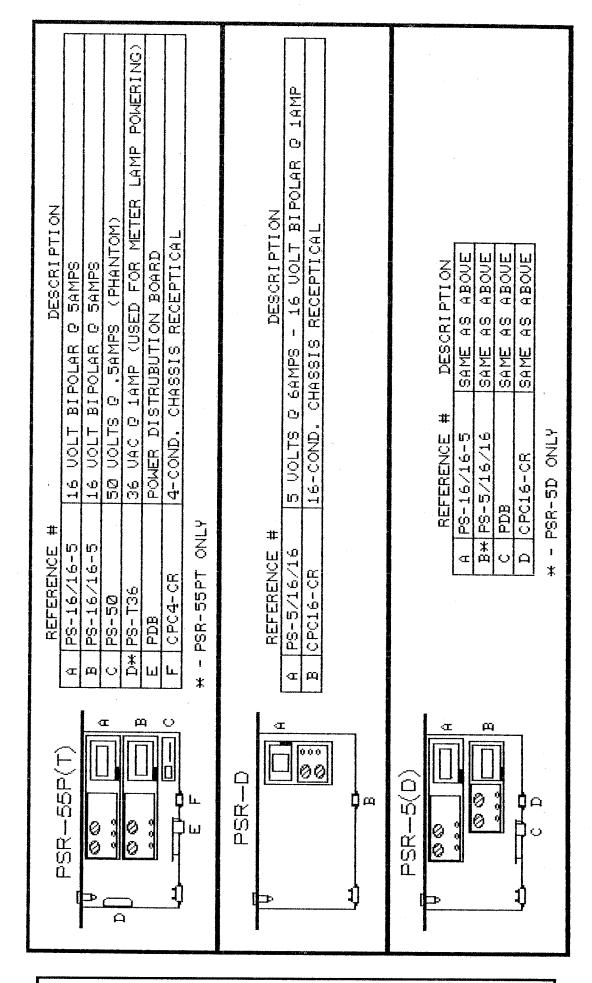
F - POWER SUPPLY CHASSIS LAYOUTS
